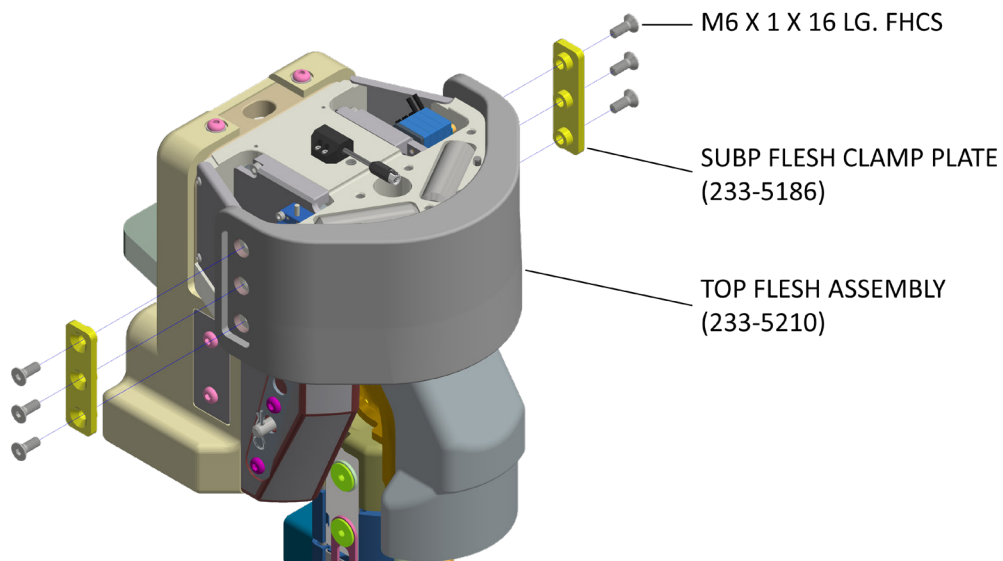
Attach the Top Flesh Assembly and Clamp Plate
